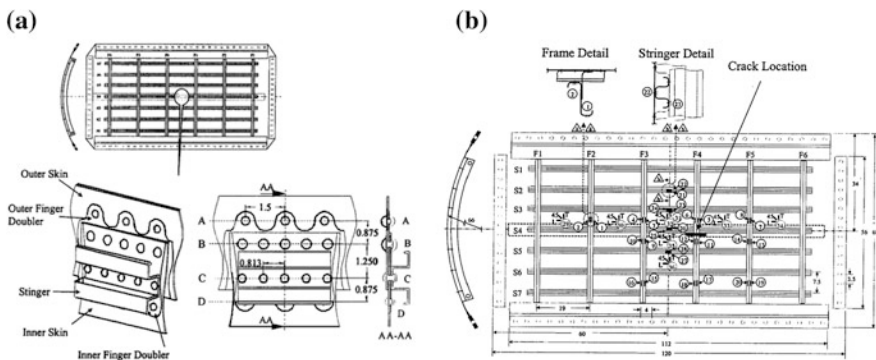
a Longitudinal joint configuration; b curved panel with a starter crack [4]
